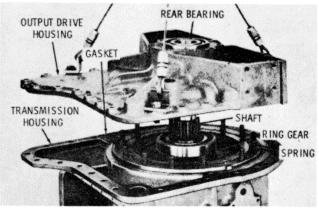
Removing Output Drive Housing from Transmission Housing
